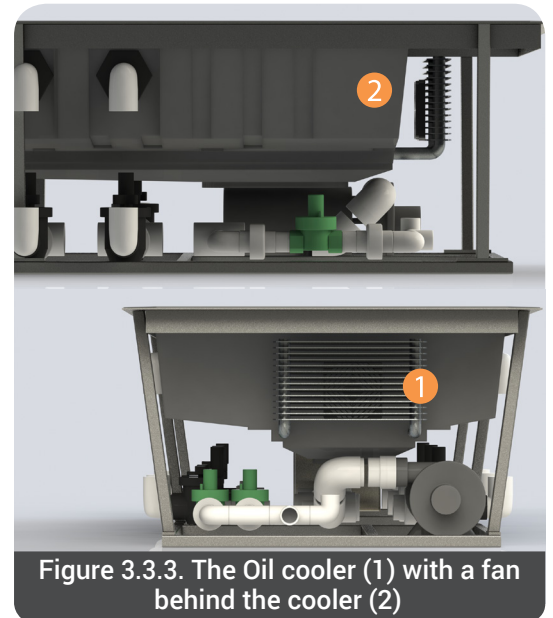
The Oil cooler (1) with a fan behind the cooler (2)
